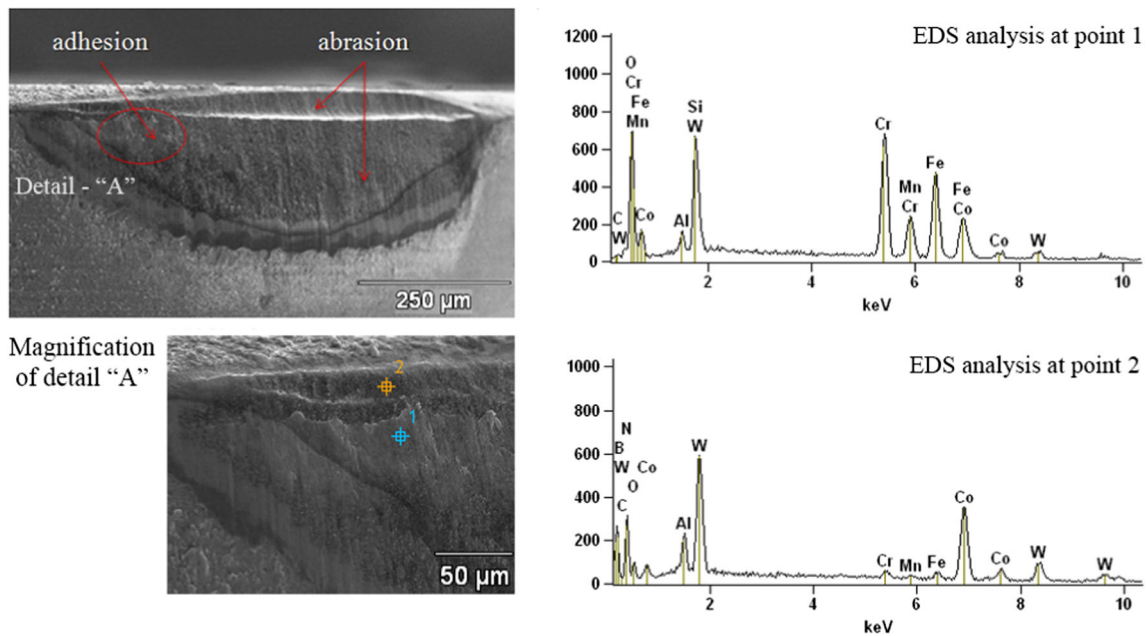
Evidence of adhesion on CBN 7050 cutting edge in interrupted cutting
